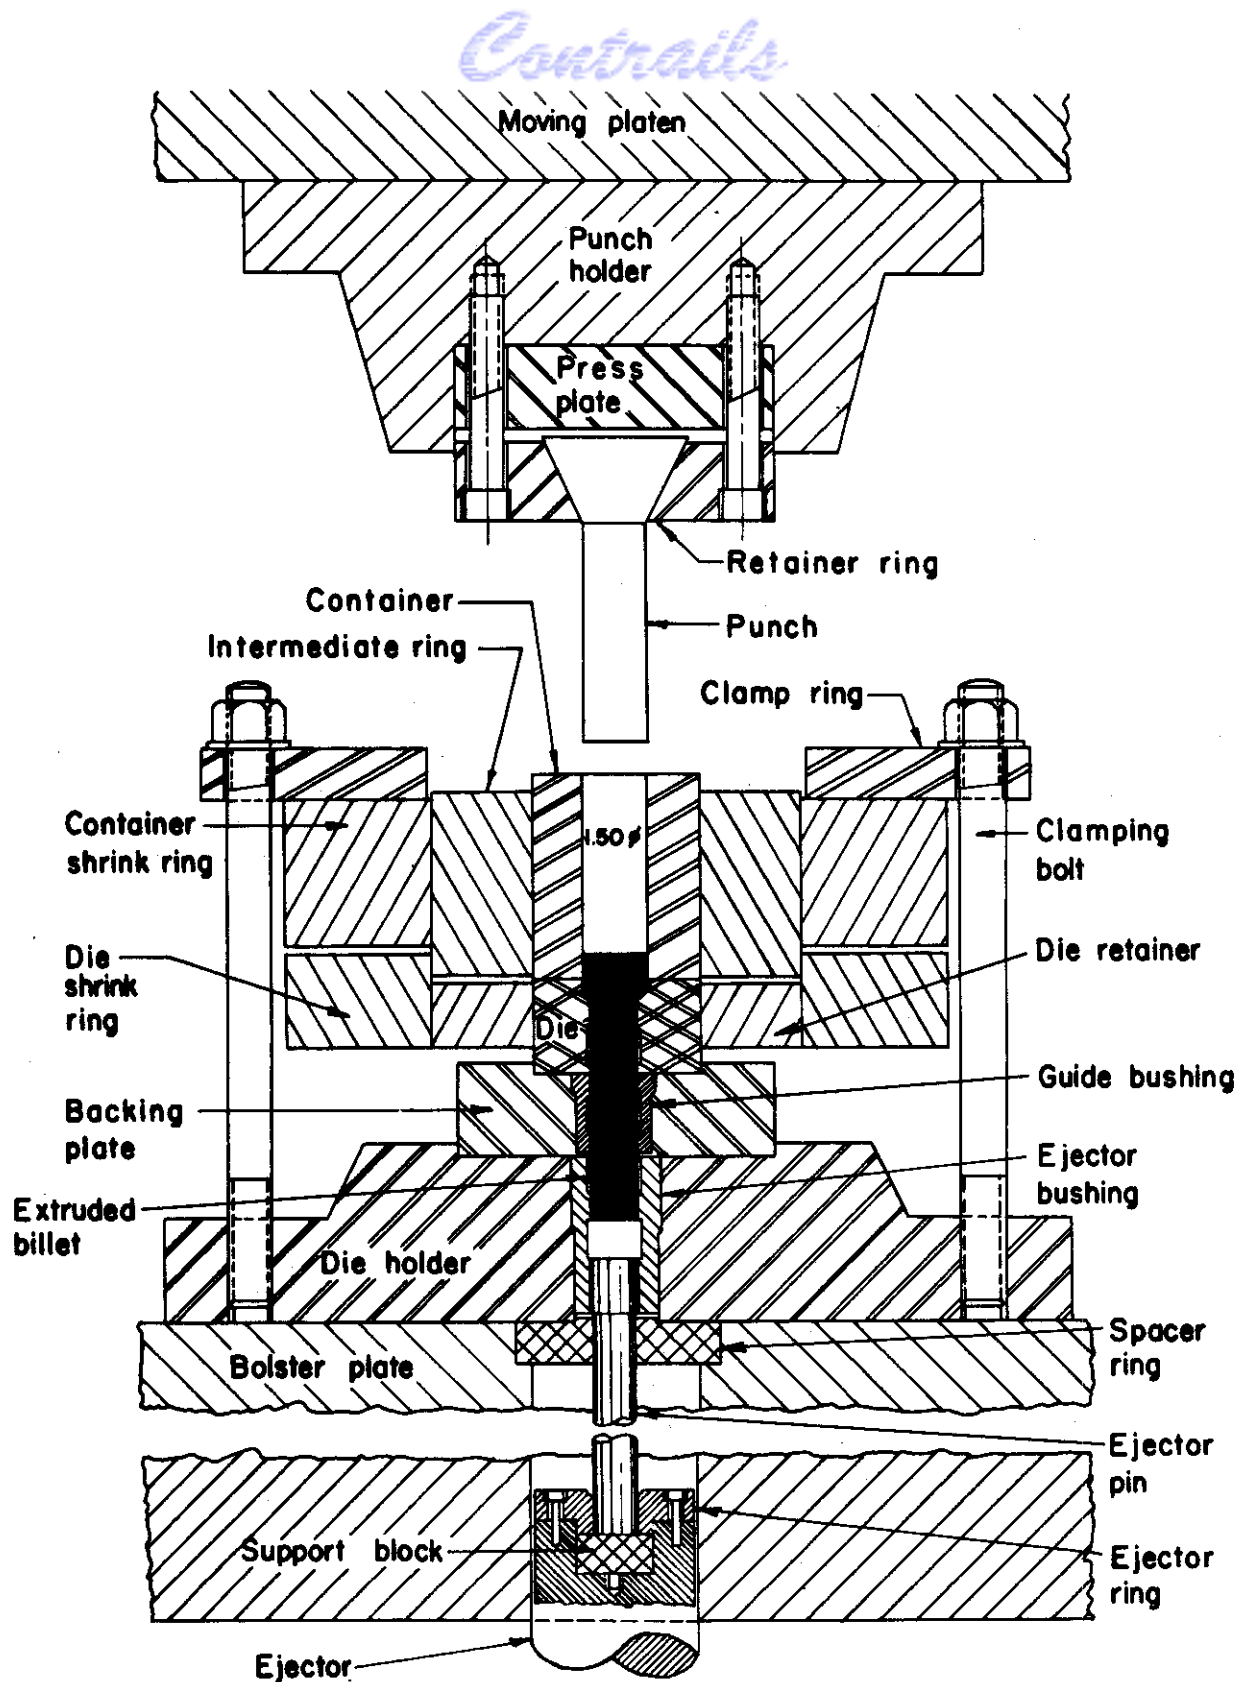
FIGURE I. ASSEMBLY DRAWING OF THE EQUIPMENT FOR CONDUCTING THE COLD-EXTRUSION EXPERIMENTS
